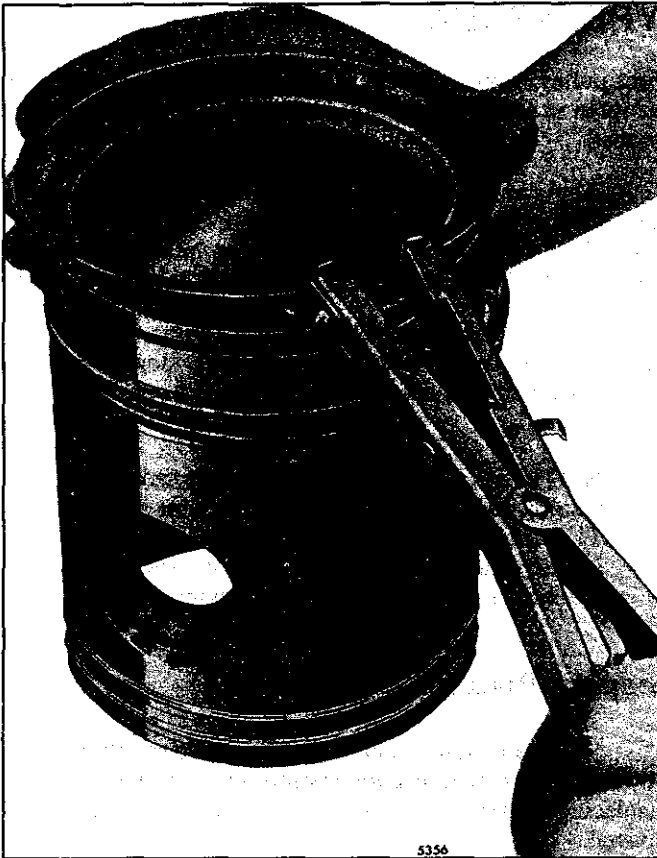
Removing or Installing Piston Rings with Tool J 8128
